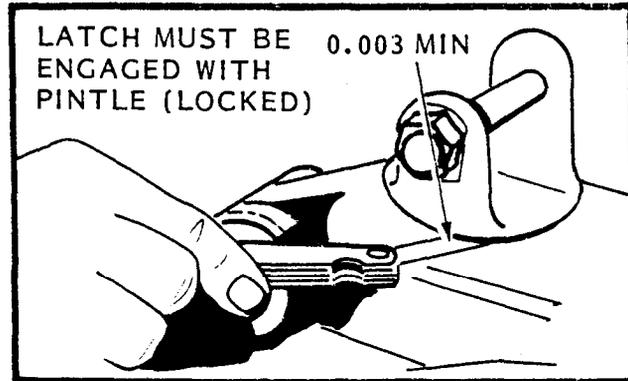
Gaging clearance between pintle shoulder and tripod head.
